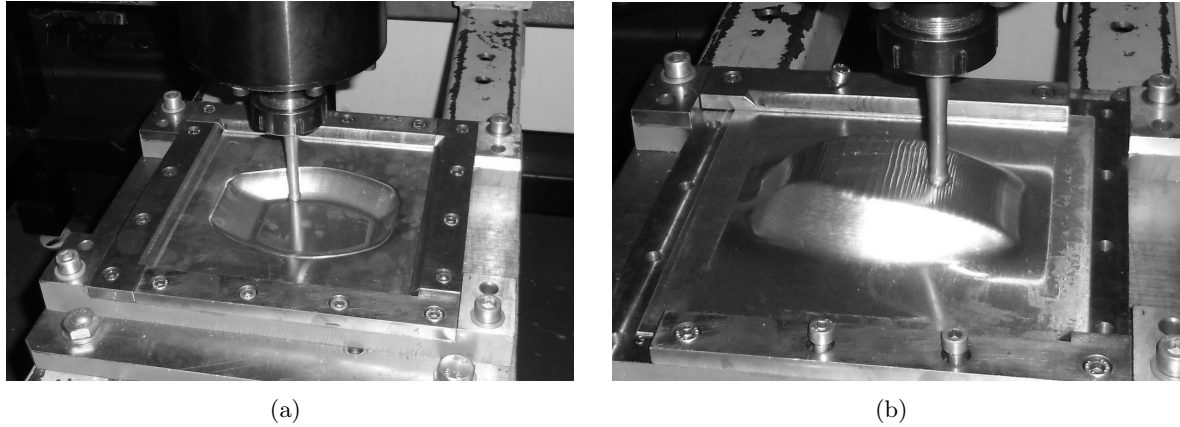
Scaled bike tank prototype top part manufacture: (a) container forming, (b) gas cover indent forming after part flip
